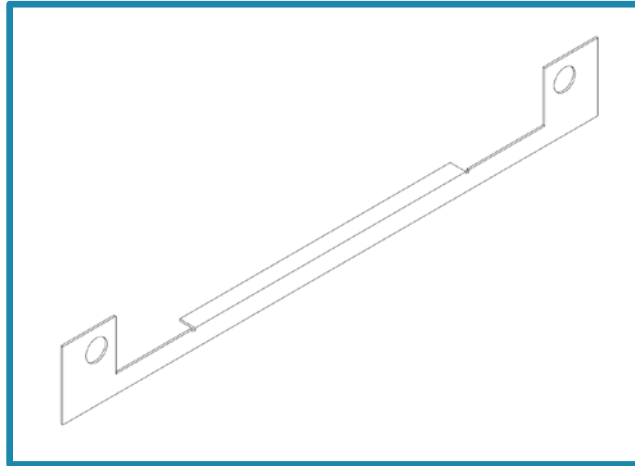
Close-up drawing of the gasket retaining clip with lip.
